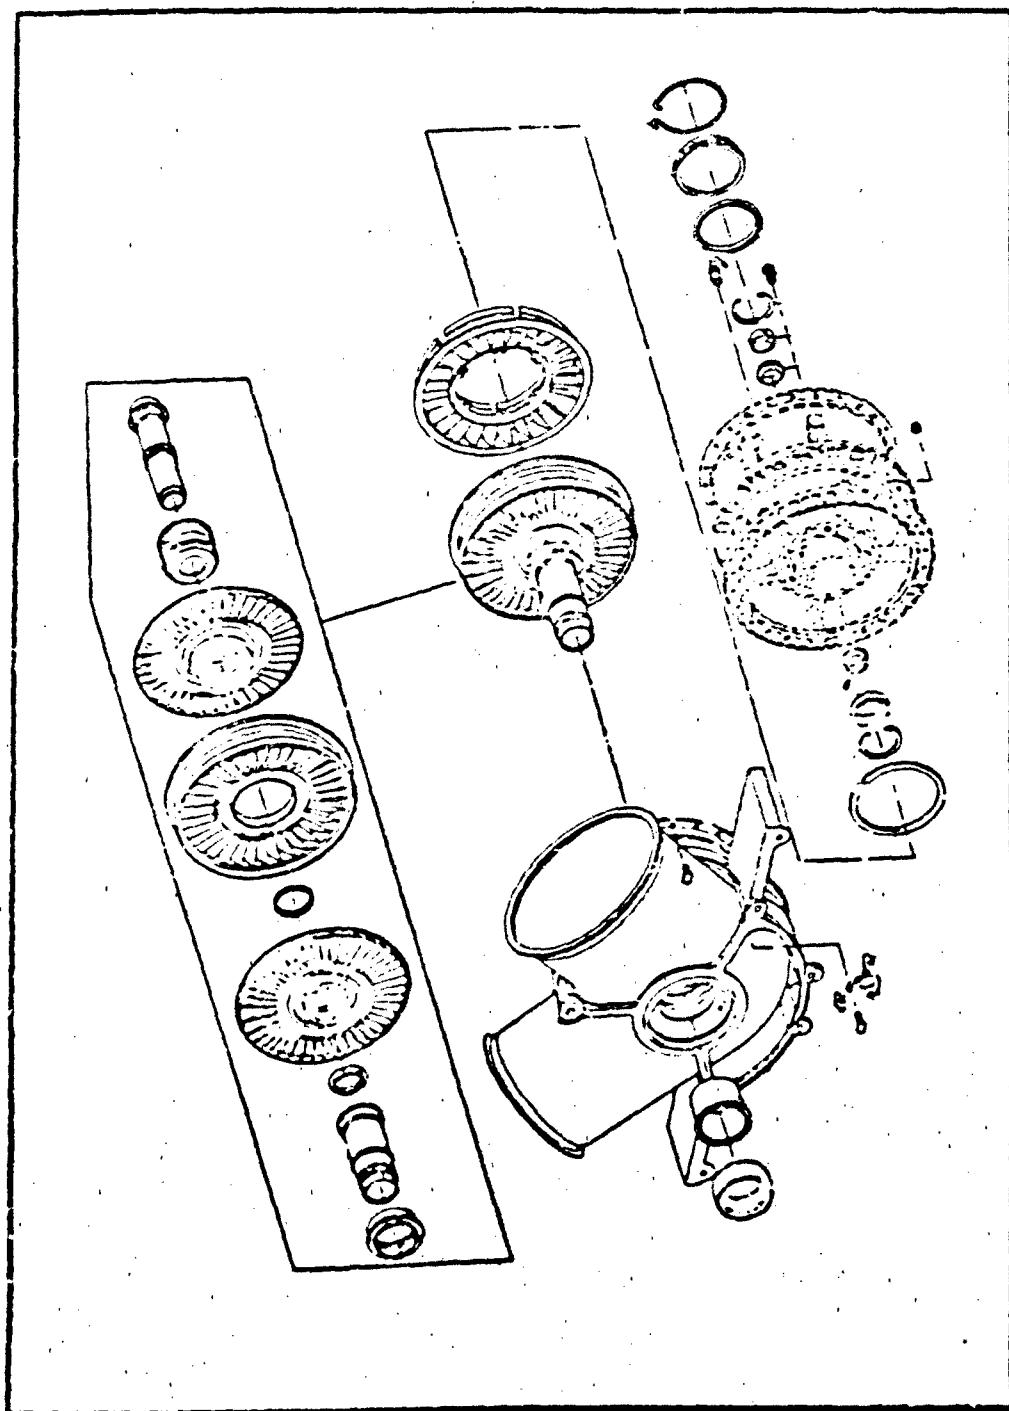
Turbine Assembly, Gas (Power Turbine Rotor and Related Parts)
